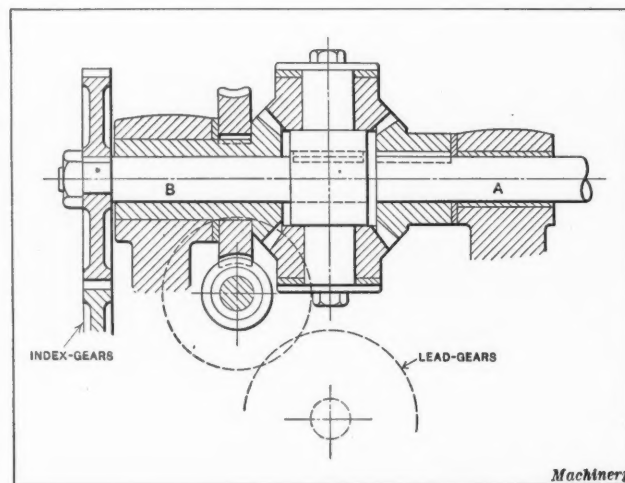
Arrangement of Gearing on No. 5 Gear-hobbing Machine
